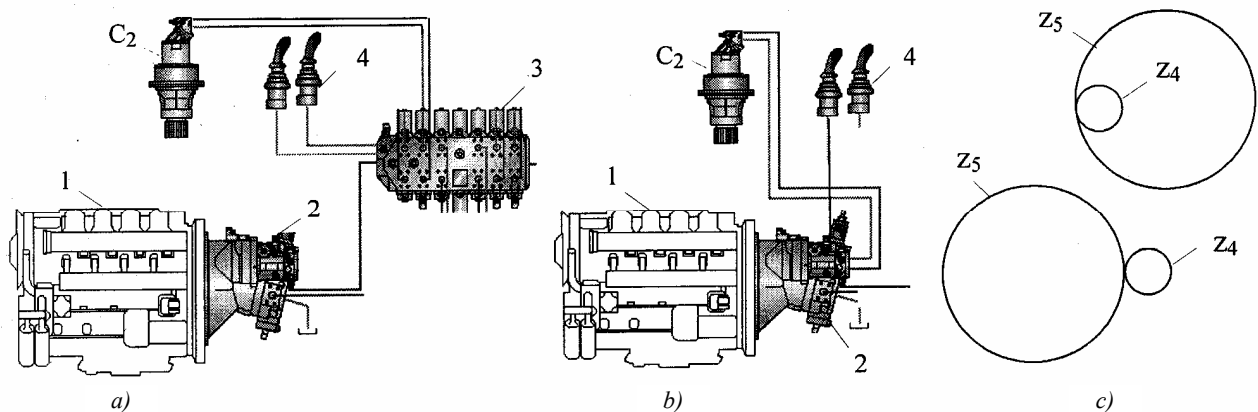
Drives of slewing platforms: a) with open hydrostatic circuit, b) with closed hydrostatic circuit, c) with internal or external conjunction of gear wheel of reducing gear and ring gear of axial bearing
